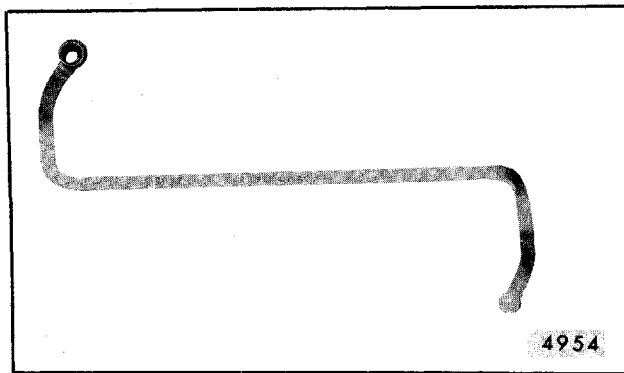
Front Door Hinge Tool J-26614 (metric) or J-24353 (inch) - All Styles with Bolt-on Hinges
